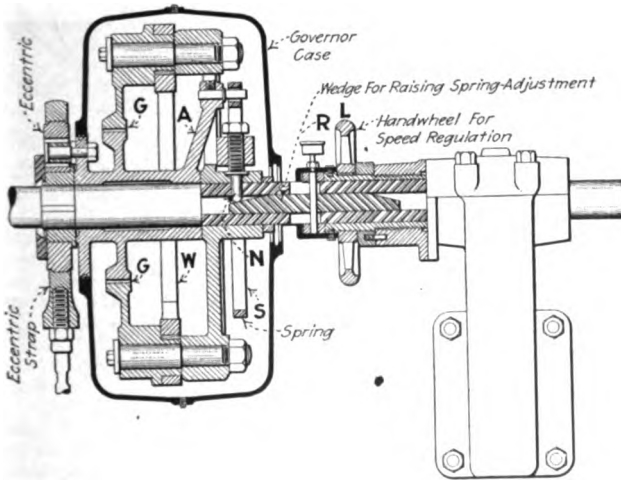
Longitudinal section of governor of the Hamilton uniflow poppet-valve engine.
